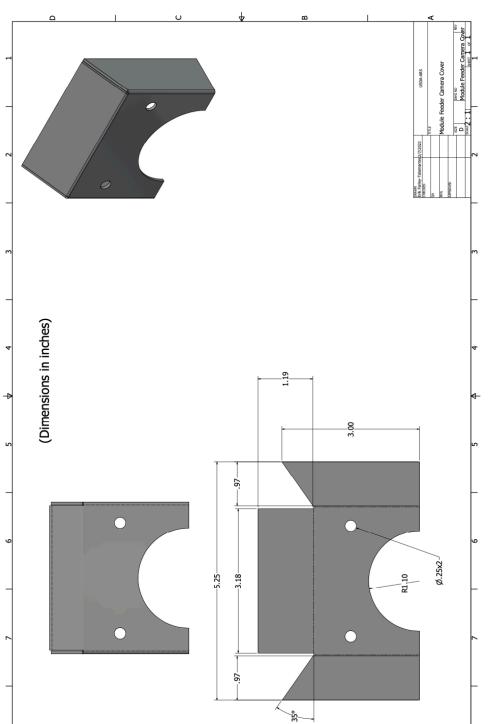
Module feeder camera housing middle section (#2 of assembly drawing).
